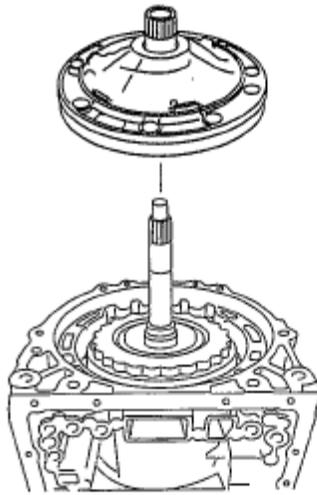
Identifying Thrust Needle Bearing, Bearing Race And O-Ring
